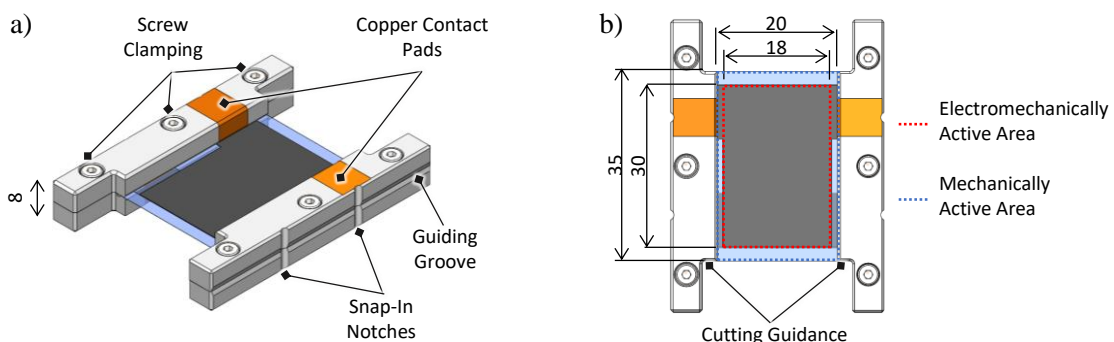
CAD Design and dimensions of SIP provided with clamps in a 3D perspective (a), and top view perspective (b).
